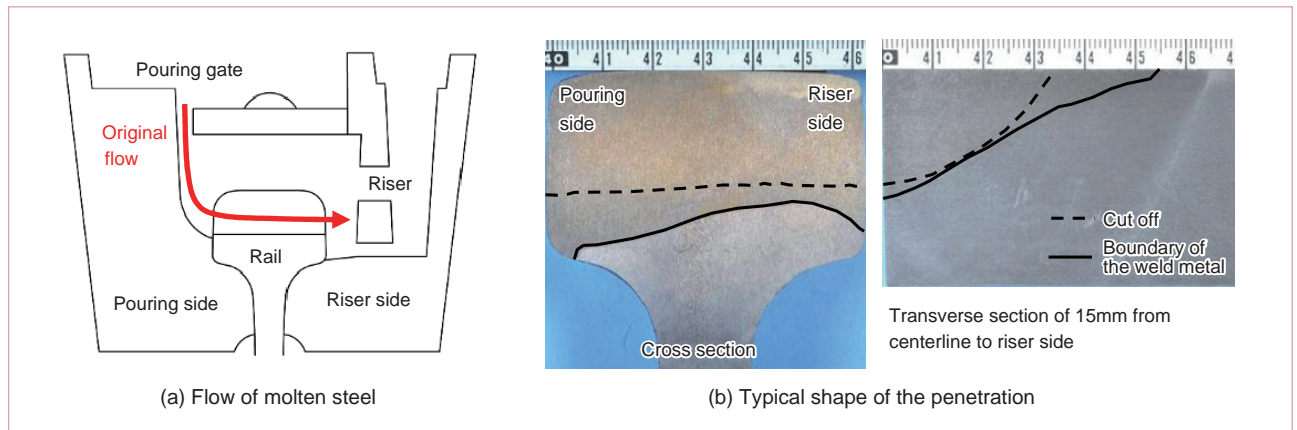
Flow of molten steel and a typical shape of the penetration by original THR mold
